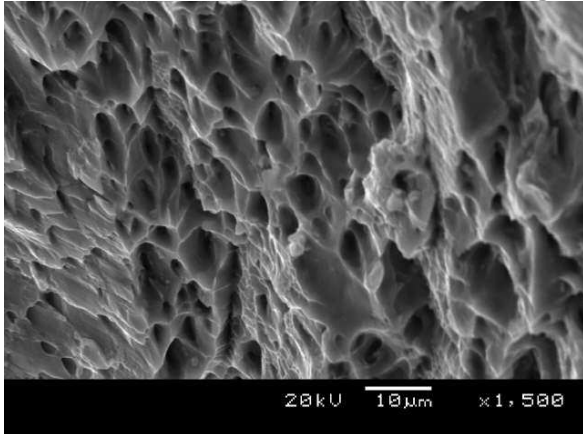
Fractograph, right hand wing top L-beam (x1500, SEM)
